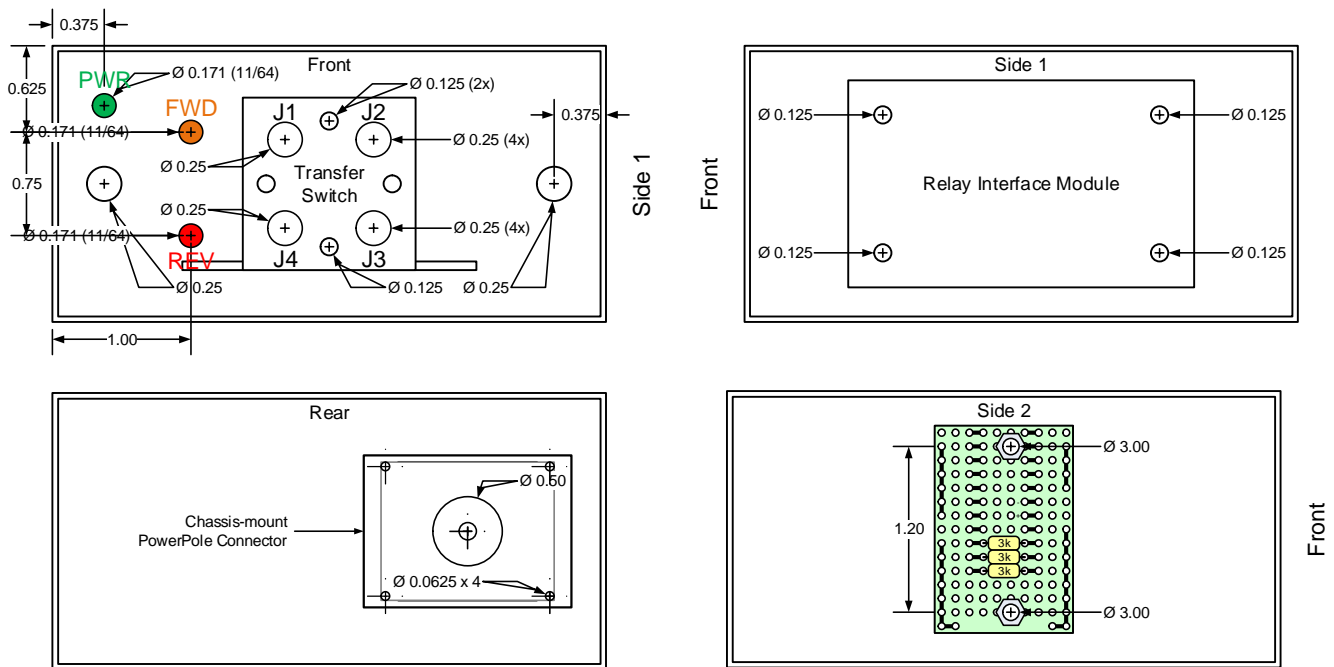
~ Enclosure layout drawing shows the cutting and drilling dimensions. All dimensions are in inches unless noted otherwise. The transfer switch mounting dimensions will depend on the actual switched used. As mentioned in the text, the PWR LED may be eliminated.
